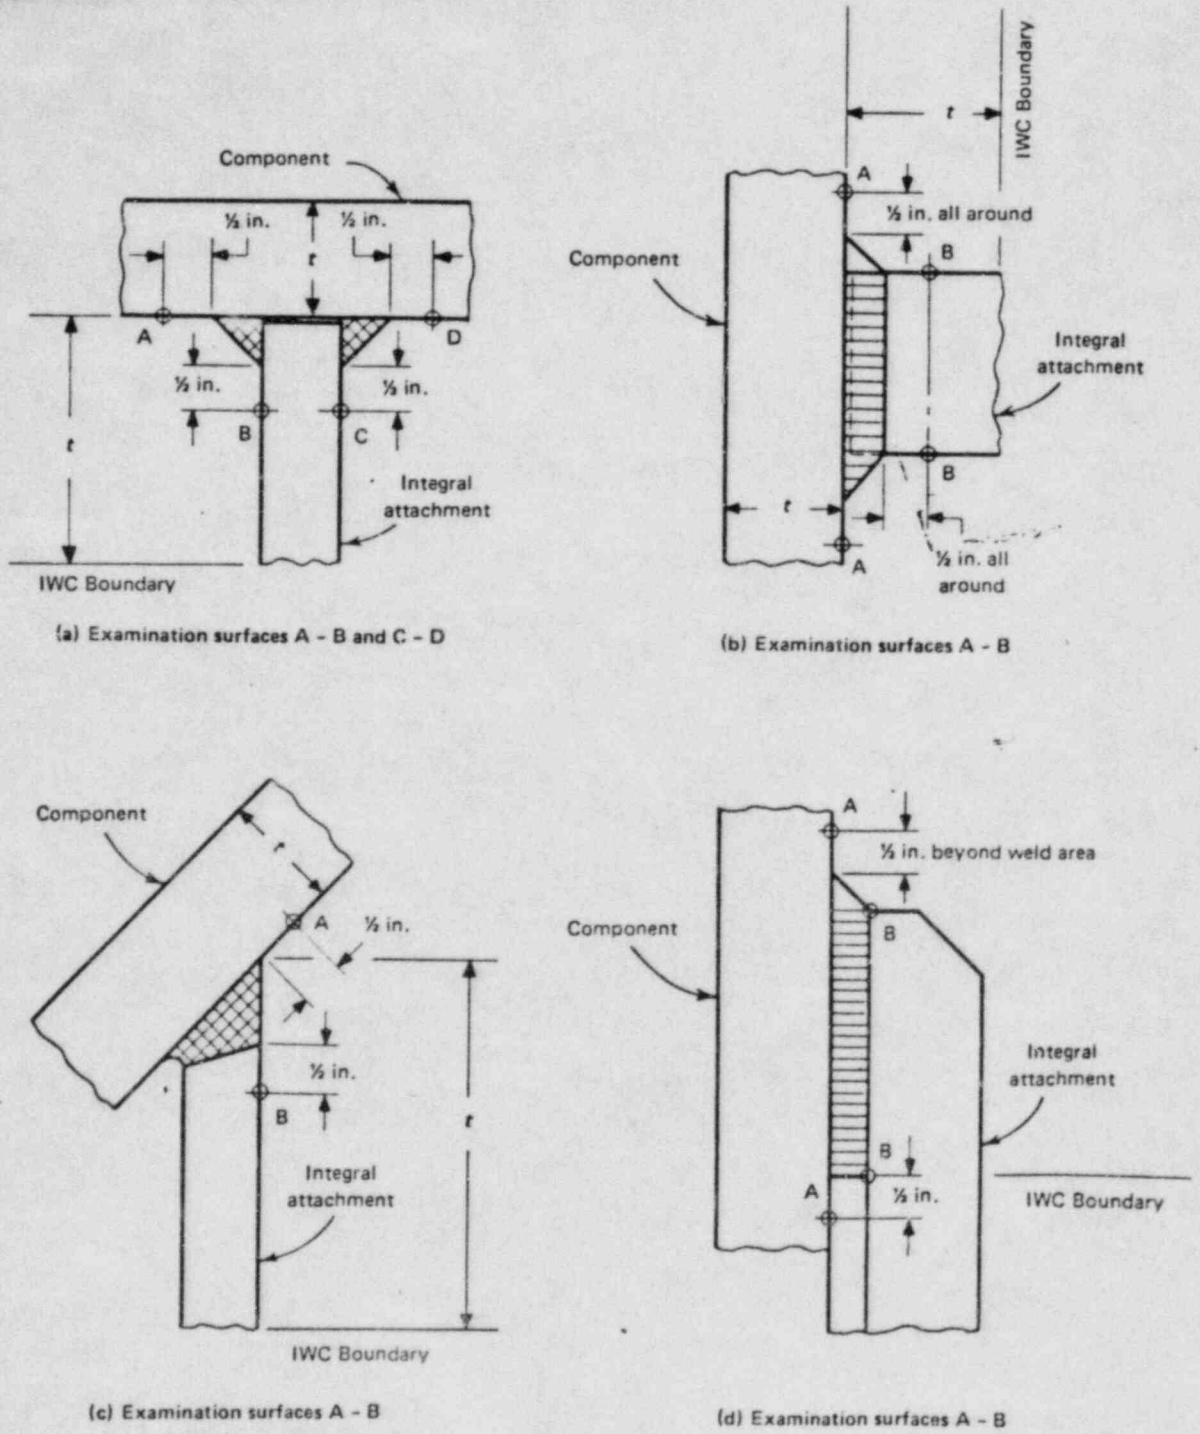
INTEGRALLY WELDED ATTACHMENTS
